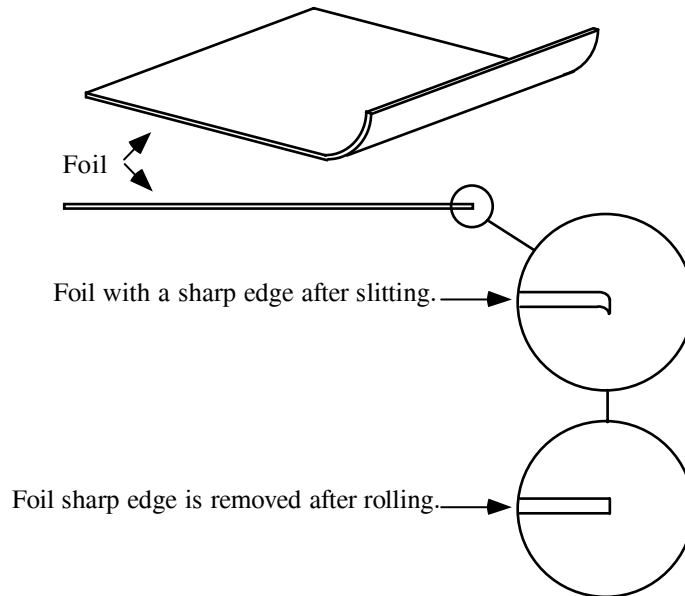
Copper Foil with the burr removed after rolling.
